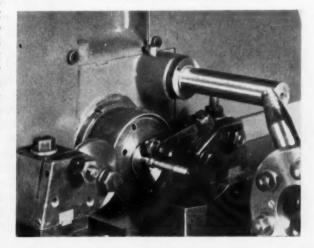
This illustration shows top knurled holder in place on cutting-off tool. Illustration courtesy Brown & Sharpe Manufacturing Company.
